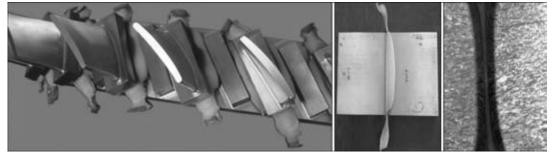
A part of as-welded blisk and macro structure of the solid state joint
